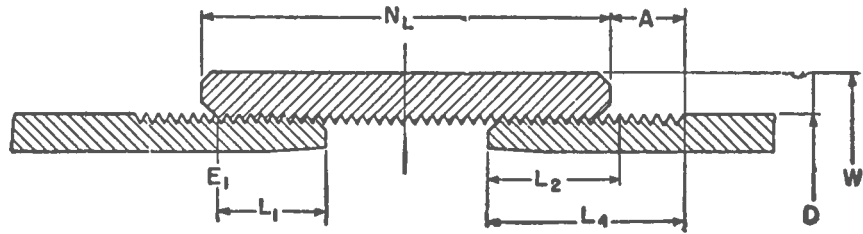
Dimensions of Hand Tight Assembly for Use with Table A5.
